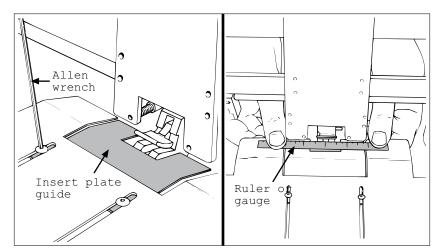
Installing Optional Insert Plate Guide and Checking for Clearance
